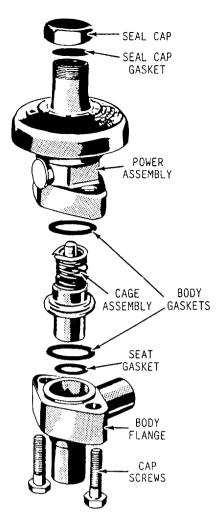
Exploded view of a typical evaporator pressure regulating valve.
